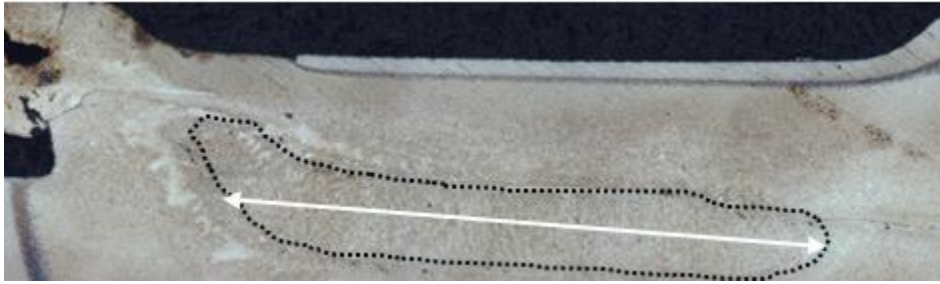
Macroscopic Cross Section of Edge Weld at 2mm
